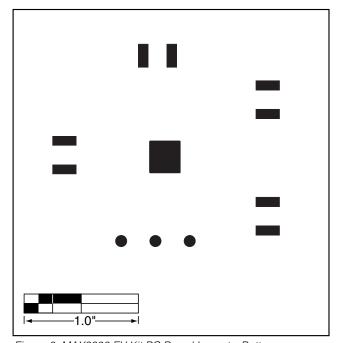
MAX9993 EV Kit PC Board Layout—Bottom Soldermask
